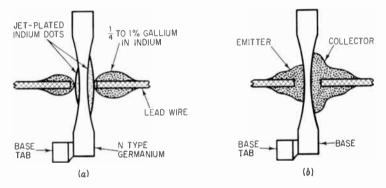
(a) Cross section of jet-etched jet-plated blank microolloy transistor with lead wires not soldered. (b) Leod wires soldered.
